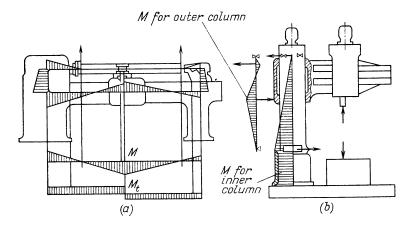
Design, bending moment and torque diagrams for a lathe (a) and radial drill (b) (after D. Reshetov)
